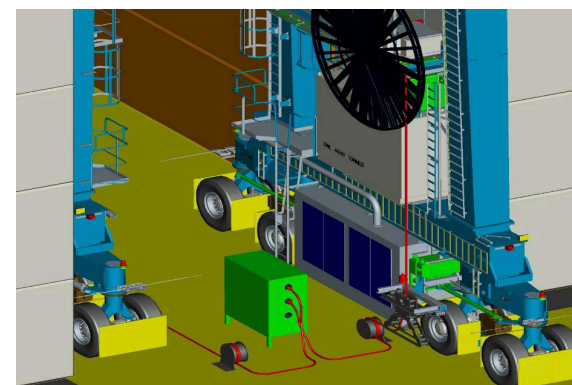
Typical Cable Reeling Drum Installation on an RTG
